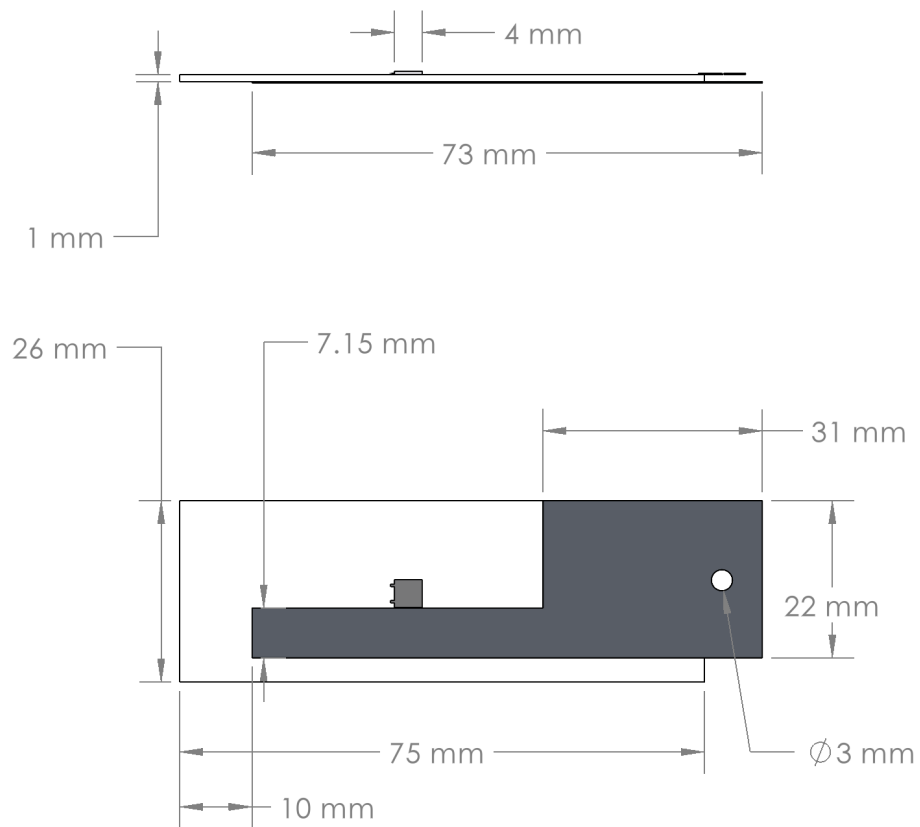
Detailed dimensions and CAD drawing of the glass slide setup.
